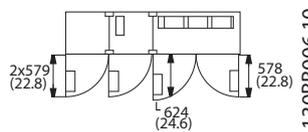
Front Clearance of IP21/IP54 Enclosure Type, Frame Size F4
